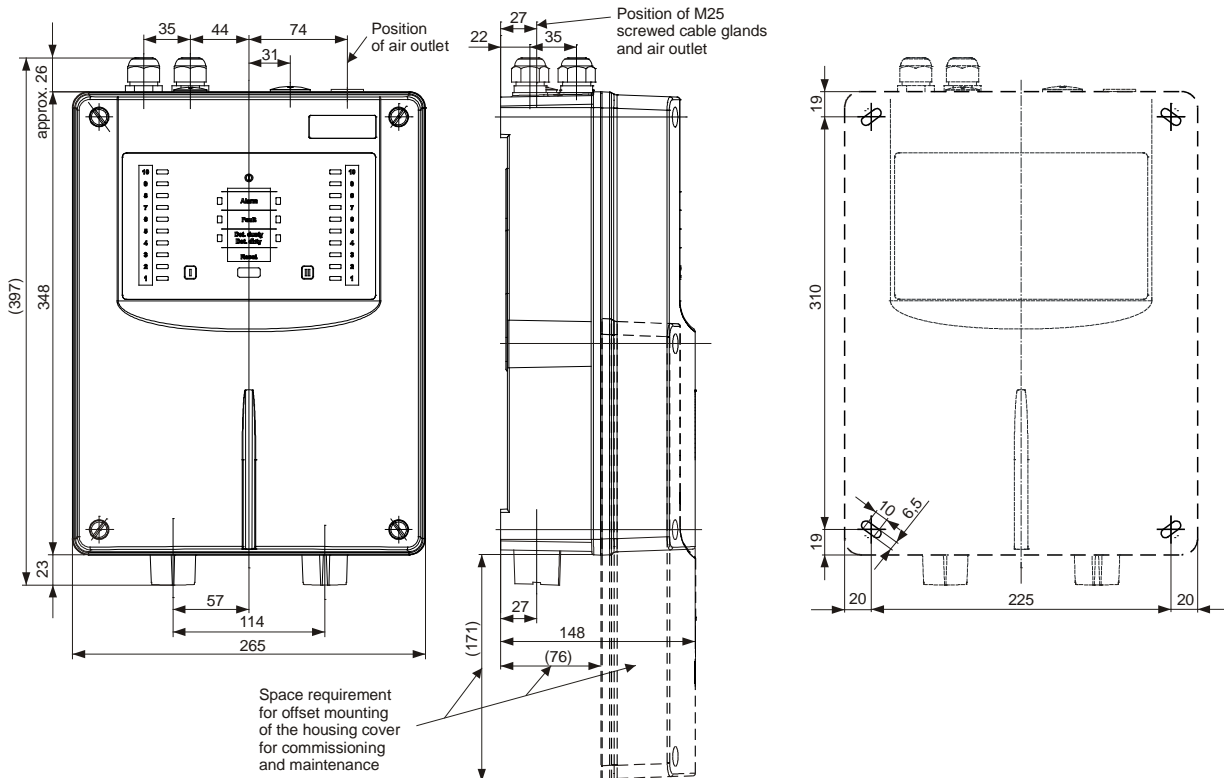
Dimensioned drawing, ASD 535 detector housing drilling plan
